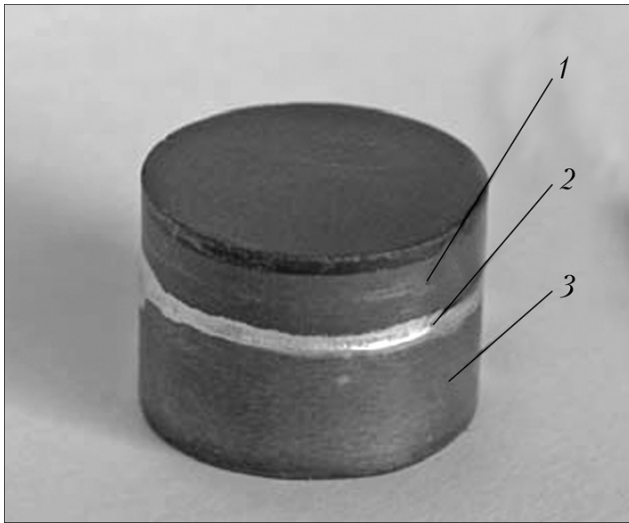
Brazed DHAC for drill tools: 1 – DHAP; 2 – brazed seam; 3 – HAH
